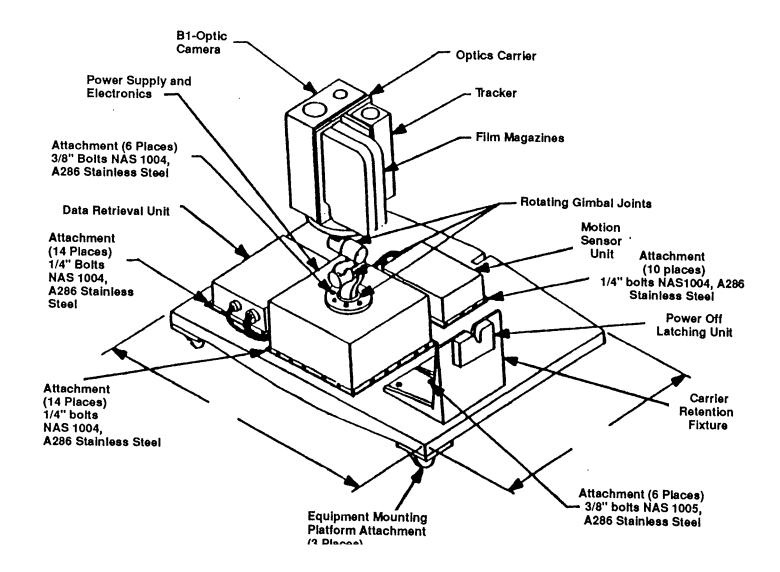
PAYLOAD FLIGHT EQUIPMENT ASSEMBLY EXAMPLE
